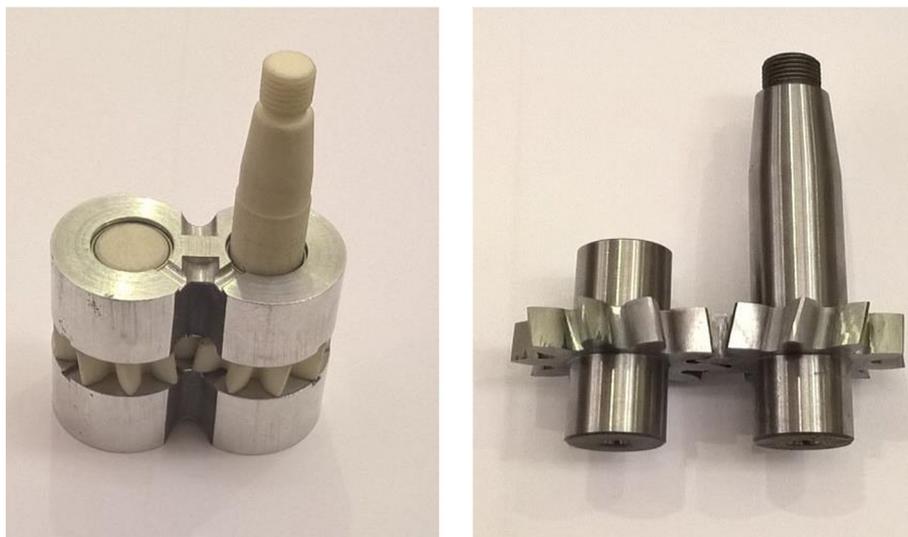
Three-rotor gears of 3D printed wheels and shaving gears
